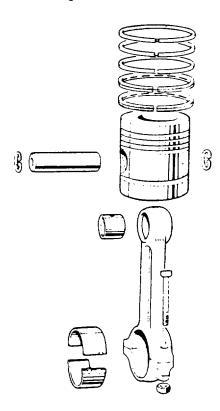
Exploded view of Piston and Connecting Rod Assembly.
